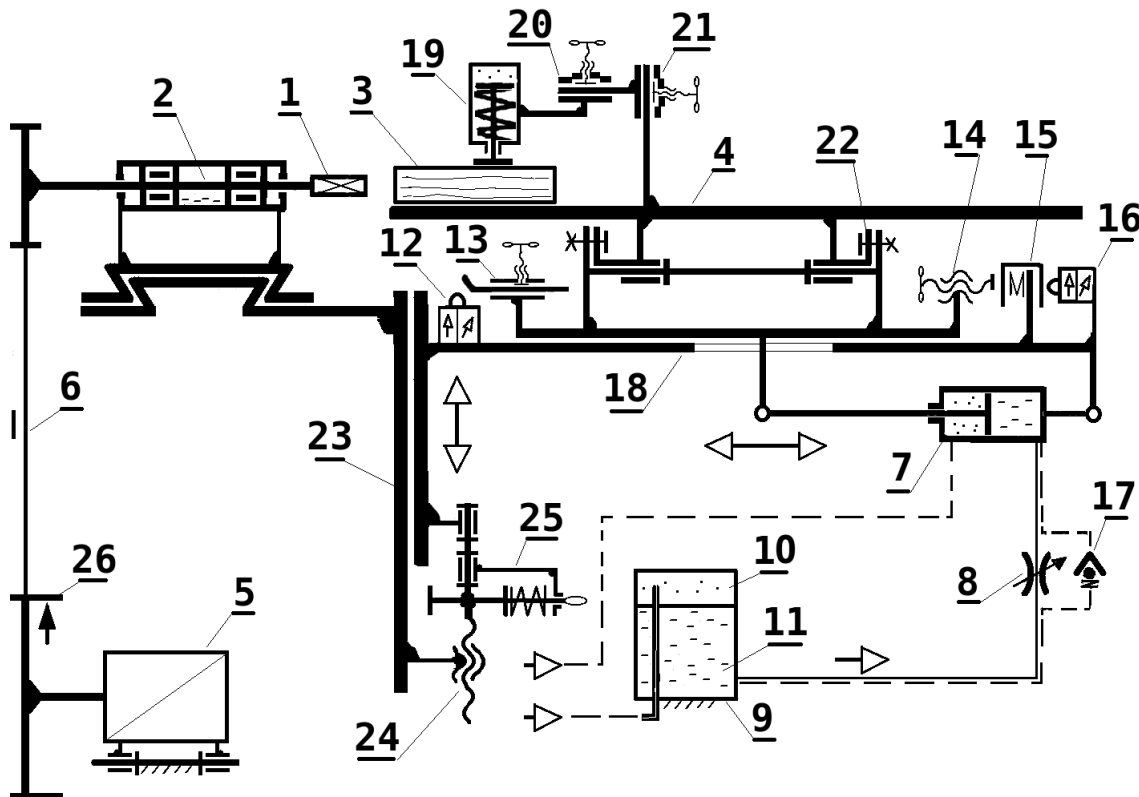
Scheme of the milling – drilling machine DWJA; 1 – drilling bit, 2 – tool spindle, 3 – working element, 4 – working table, 5 – electrical motor, 6 – belt transmission, 7 – hydraulic – pneumatic cylinder, 8 – throttle valve, 9 – hydraulic – pneumatic reservoir, 10 – air, 11 – oil, 12 – end switch, 13 – adjustable cam, 14 – adjustable back stop, 15 – bumper, 16 – back stop switch, 17 – reversible valve, 18 – horizontal working table support, 19 – single acting fixing air cylinder, 20 – horizontal adjusting and fixing mechanism, 20 – vertical adjusting and fixing mechanism, 22 – table turn mechanism, 23 – vertical working table support, 24 – screw mechanism, 25 – latch mechanism, 26 – electrical motor friction brake
